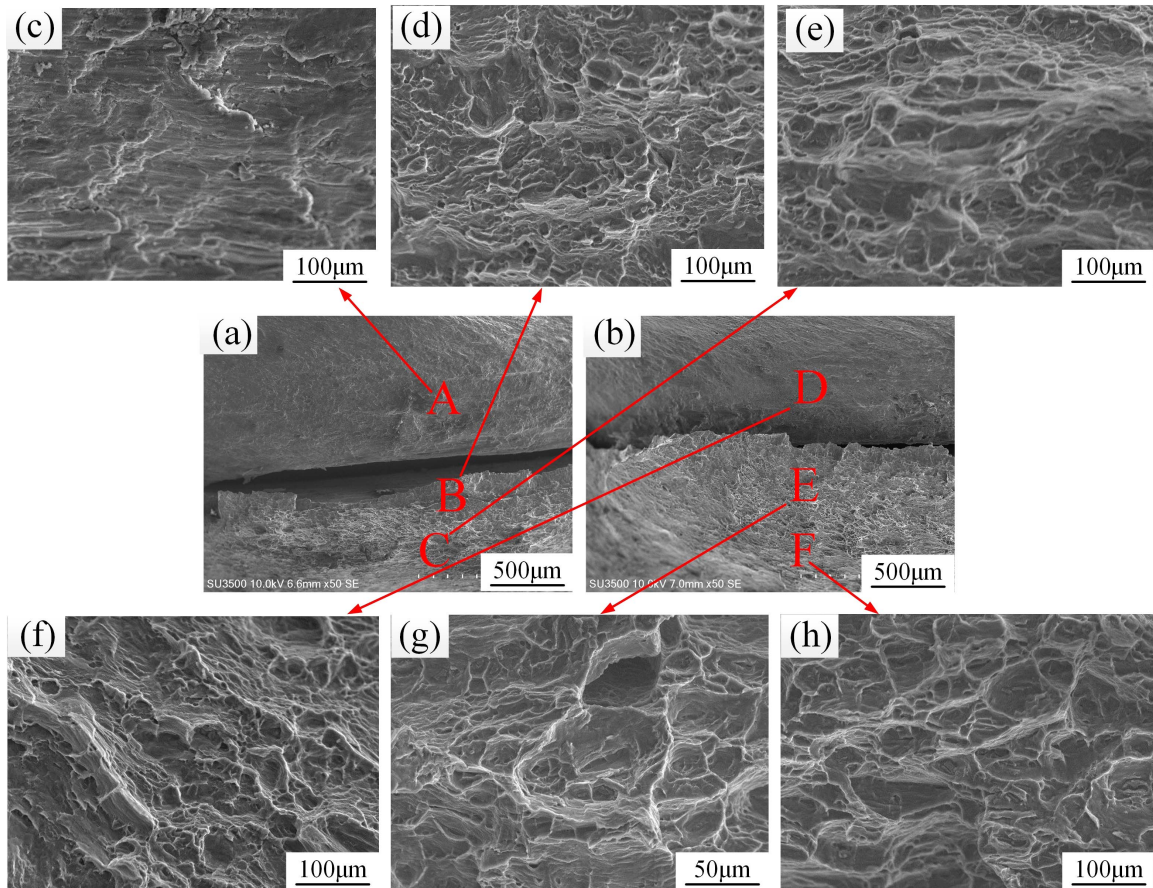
Fracture surface morphologies of typical repaired joints: macro-morphologies of (a) conventional A-PFFSR and (b) ultrasonic assisted A-PFFSR; micro-morphologies of (c-e) enlarged views marked in Fig. 10a and (f-h) enlarged views marked in Fig. 10b
